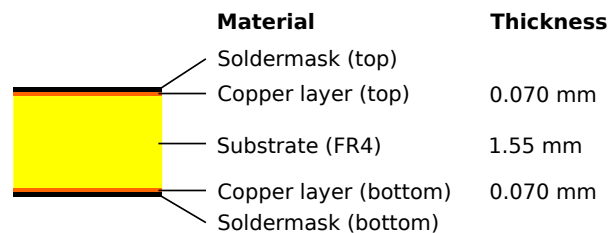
The PCB consists of base layer of FR4 and two copper layers. The copper layers are partially covered by soldermask.
